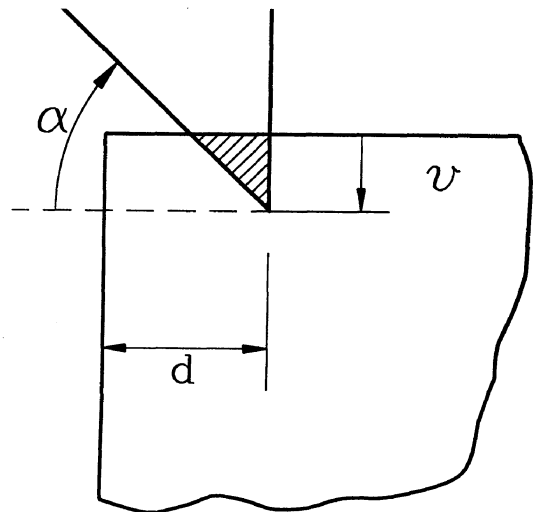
Geometry of a specimen and the cutting tool during initial indentation
